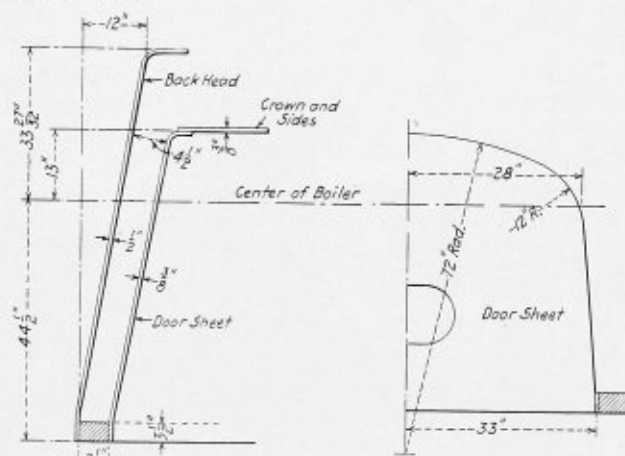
Method of Determining Stretchout of Inside Firebox Wrapper Sheet
